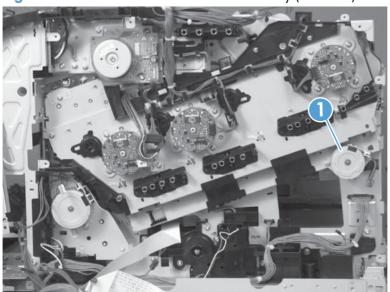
Reinstall the main drive assembly (11 of 11)
